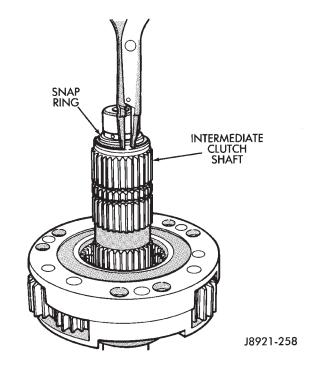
Intermediate Clutch Shaft Snap-Ring Removal
